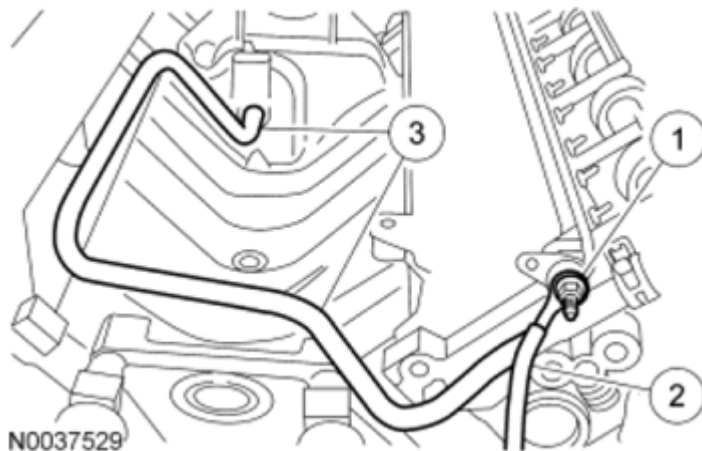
Identifying Retaining Nut, Ground Strap And Coolant Bypass Tube
